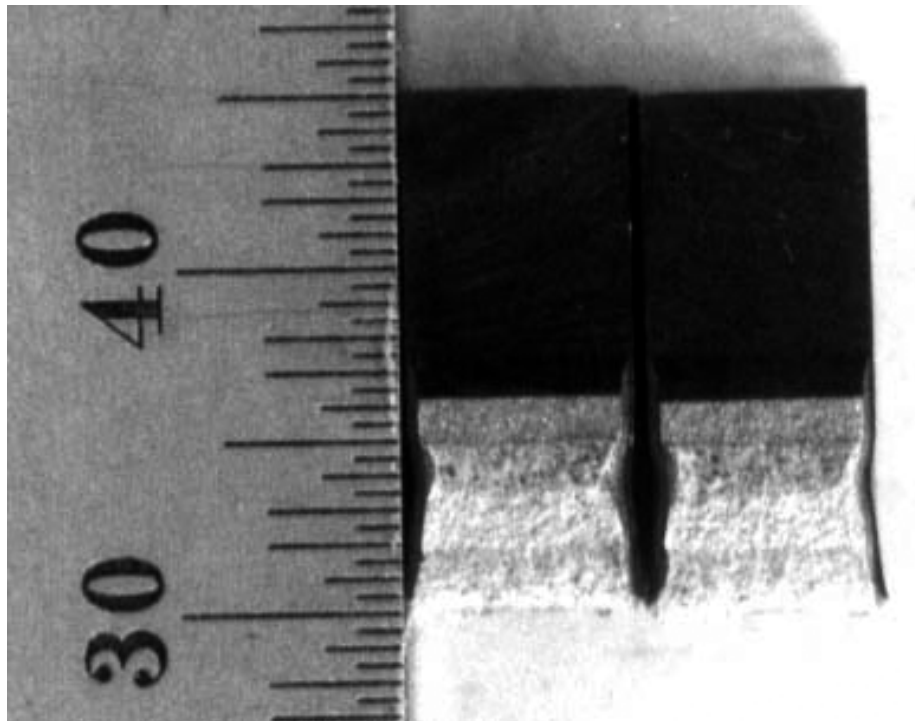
Fracture surface of specimen C16-A tested at 288°C
